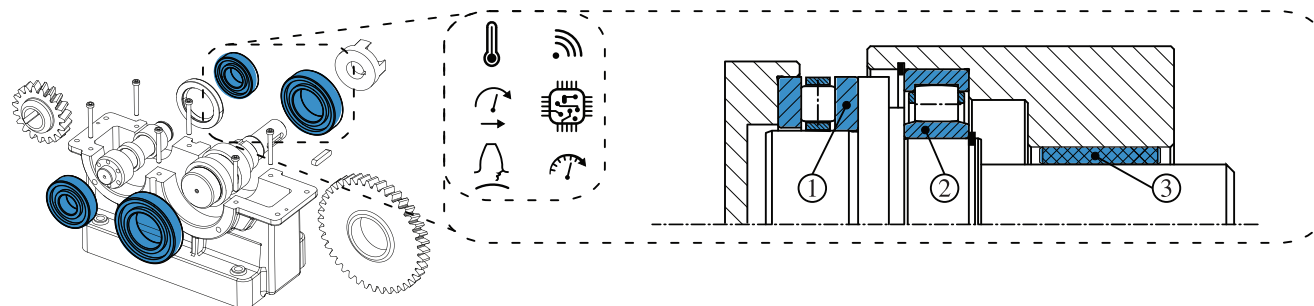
Sensor-integrating gear box, focusing on sensor-integrating bearings and their measuring task exemplified by a axial roller bearing (1), a radial roller bearing (2), and a plain bearing (3).
